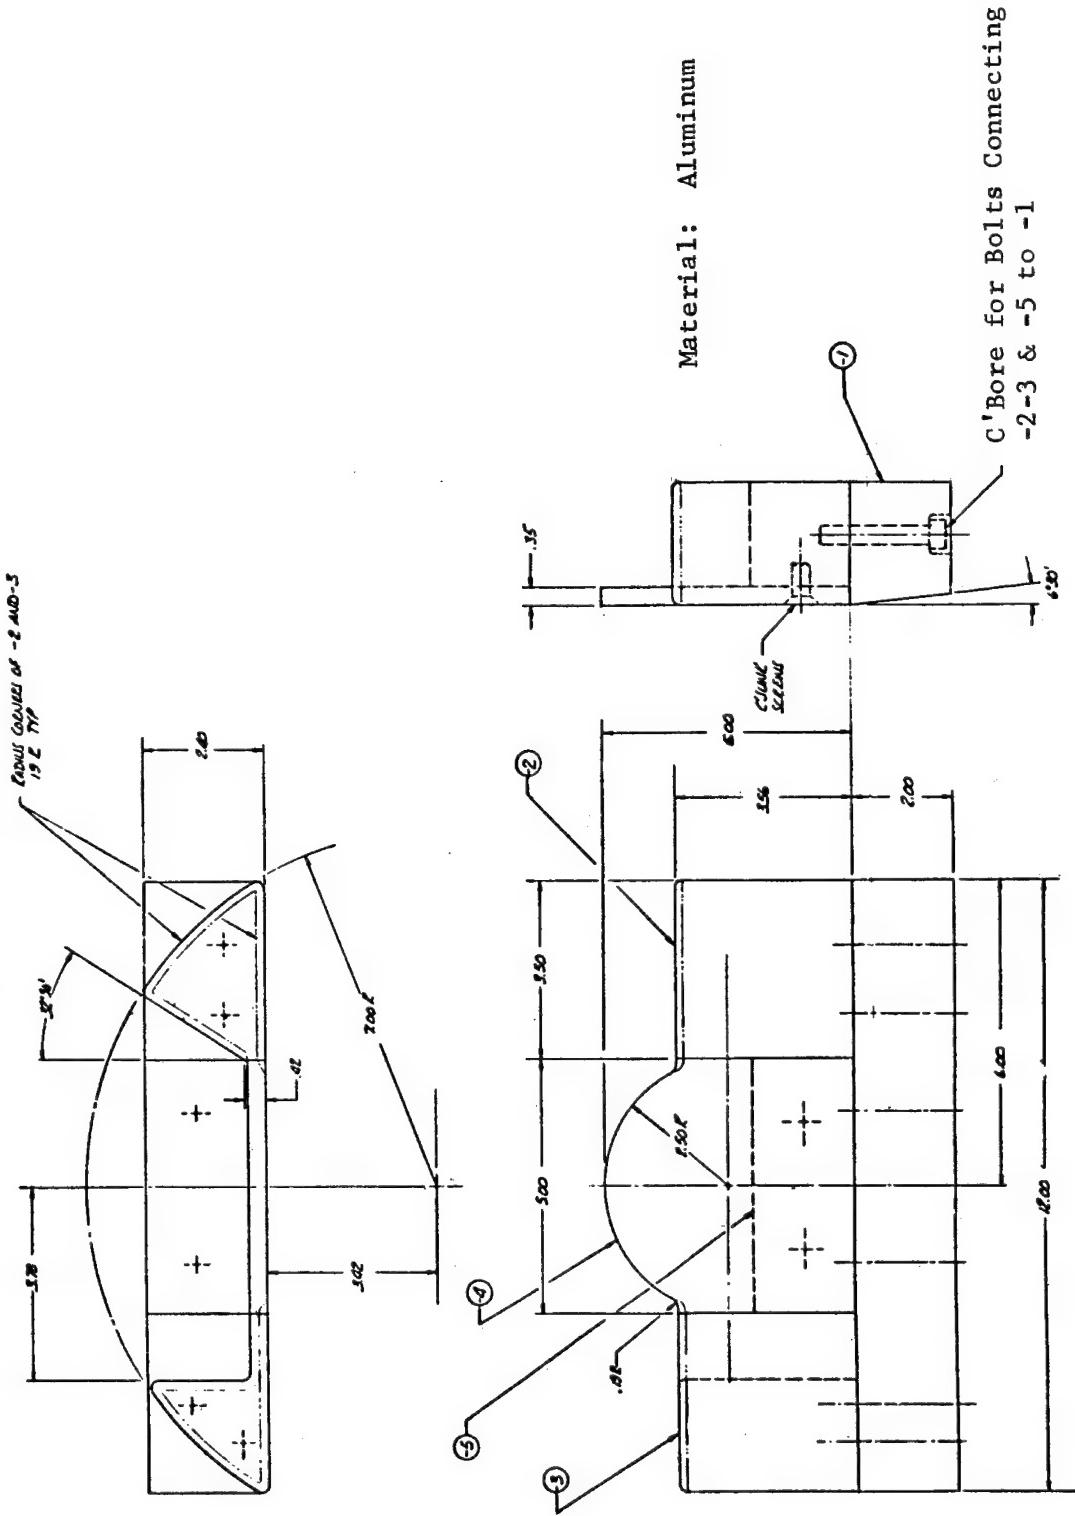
Layup Tool, Internal Bearing Support - Helicopter Transmission Housing (WRD Drawing No. 4713).
